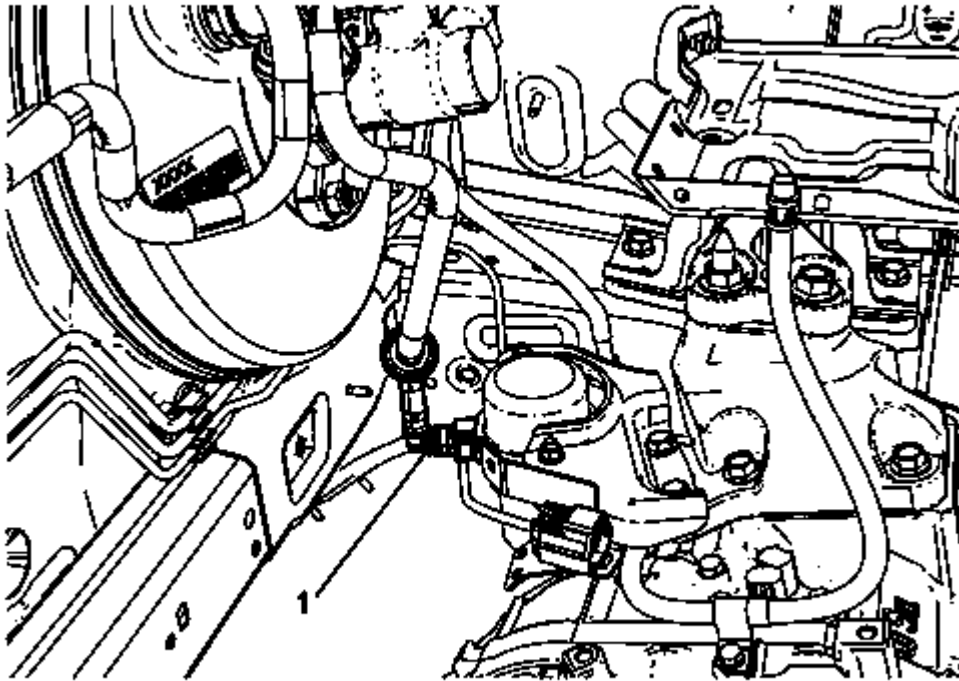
Power Brake Booster Vacuum Hose Quick Connector
